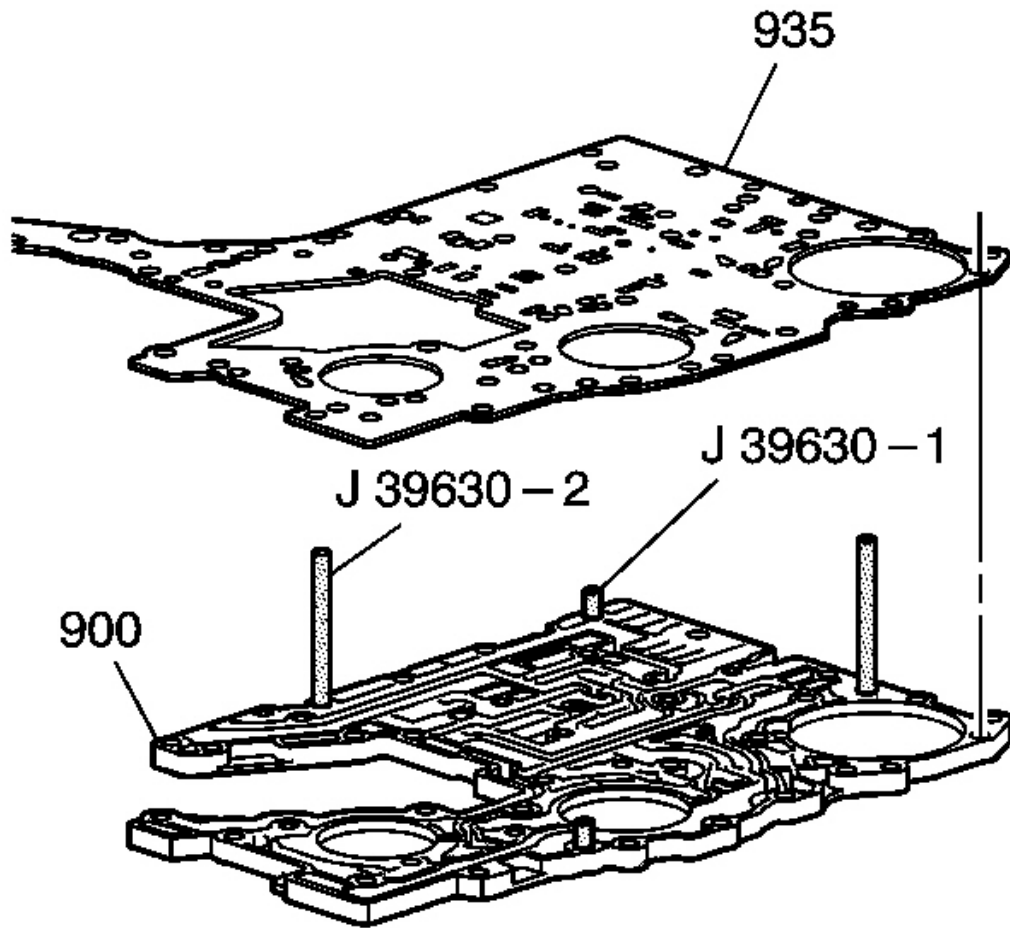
Installing The Spacer Plate And Gasket Assembly (935) Onto The Lower Channel Plate Using J 39630-1 & J 39630-2
